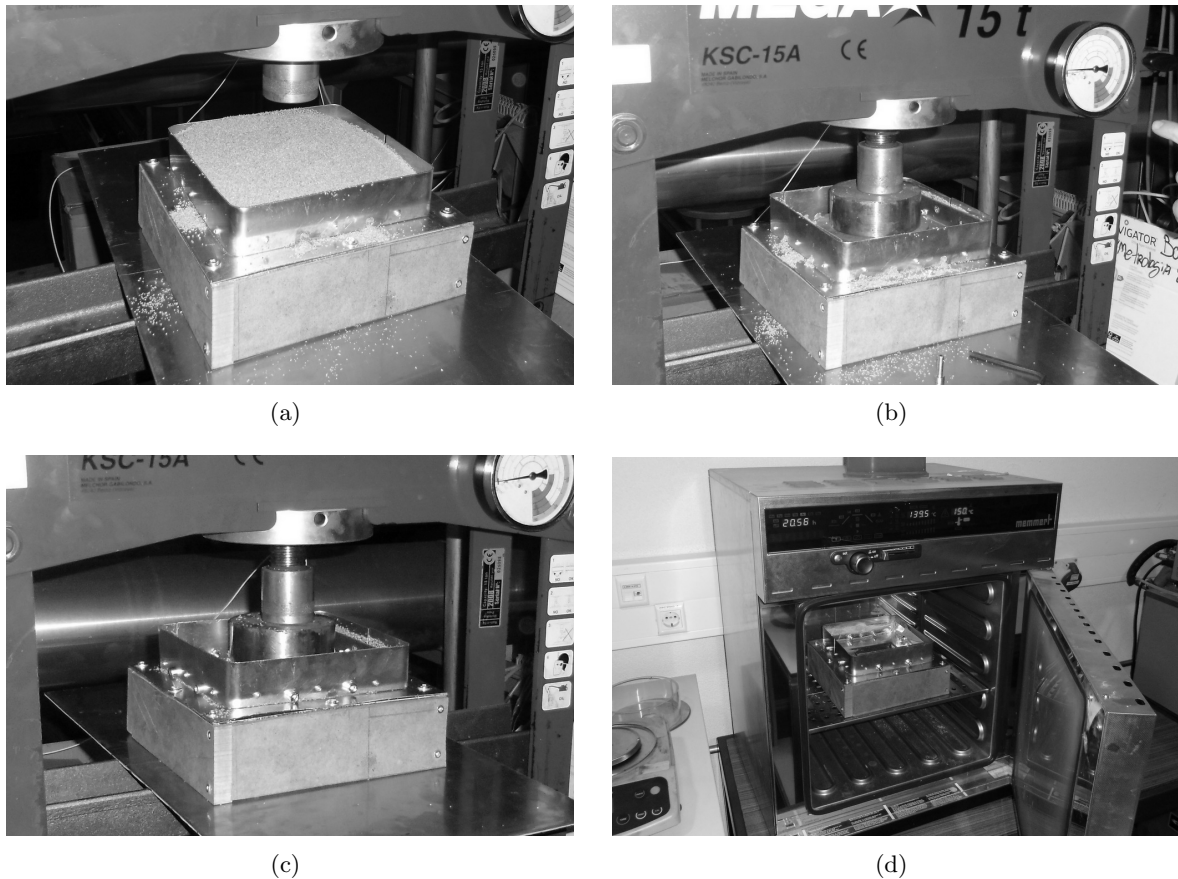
Cork compression moulding with complete SPIF sheet metal mould: (a) cork mixture inside mould cavity and frame box extension; (b) mould under pressure; (c) locked mould after pressure release; (d) closed mould inside oven
